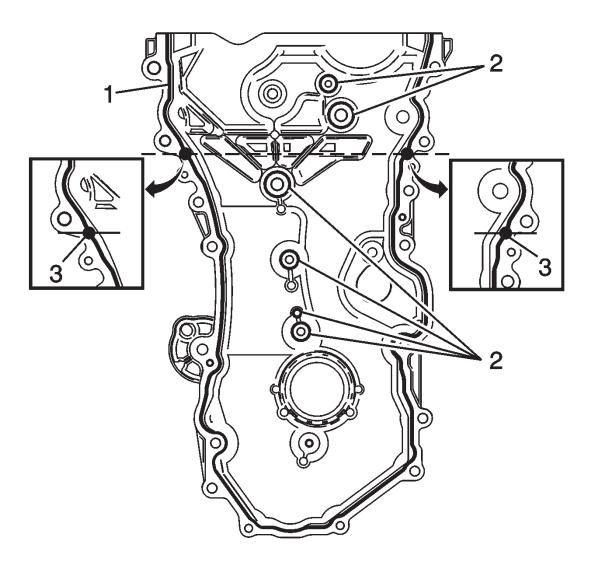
Appling Bead Of Sealer Directly In Flange Courtesy of GENERAL MOTORS COMPANY
